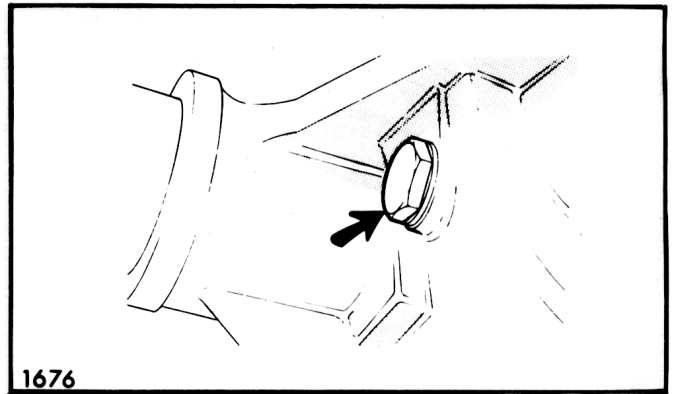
Axle oil filler/level plug — TR8 and Rover 3500
